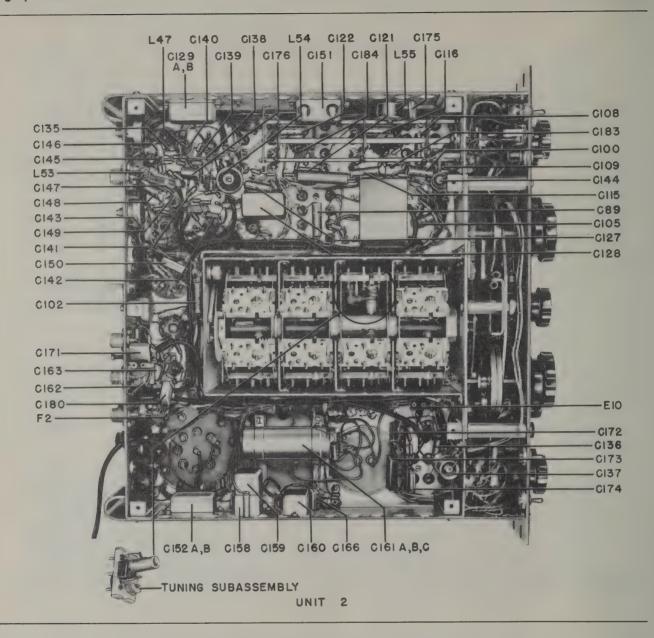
Receiver R-450/FRR-28, Bottom View, Location of Components
